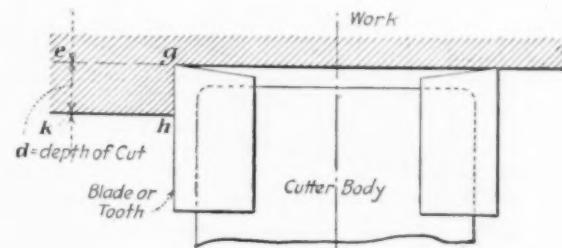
FACE MILL WITH SQUARE CORNERS ON BLADES
